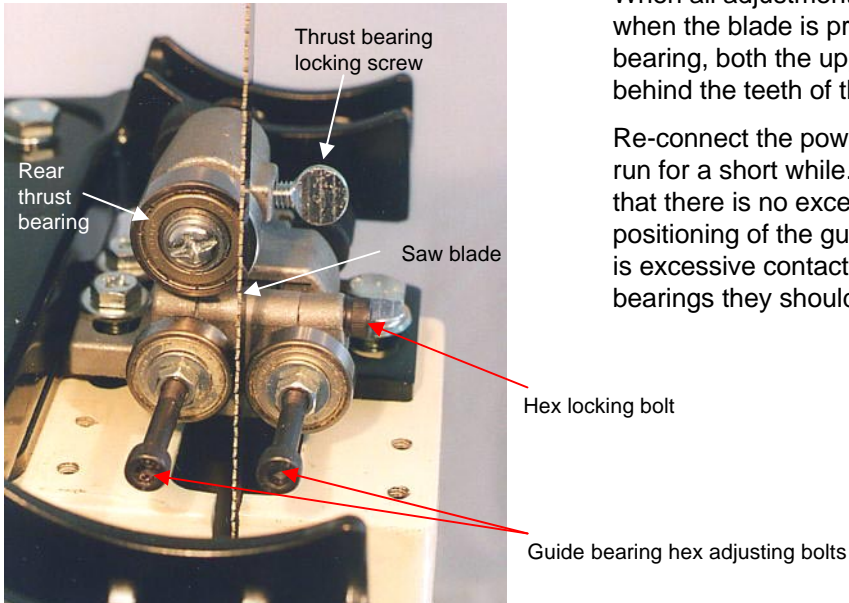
Lower blade guide from front (saw table and deflecting plates removed)
